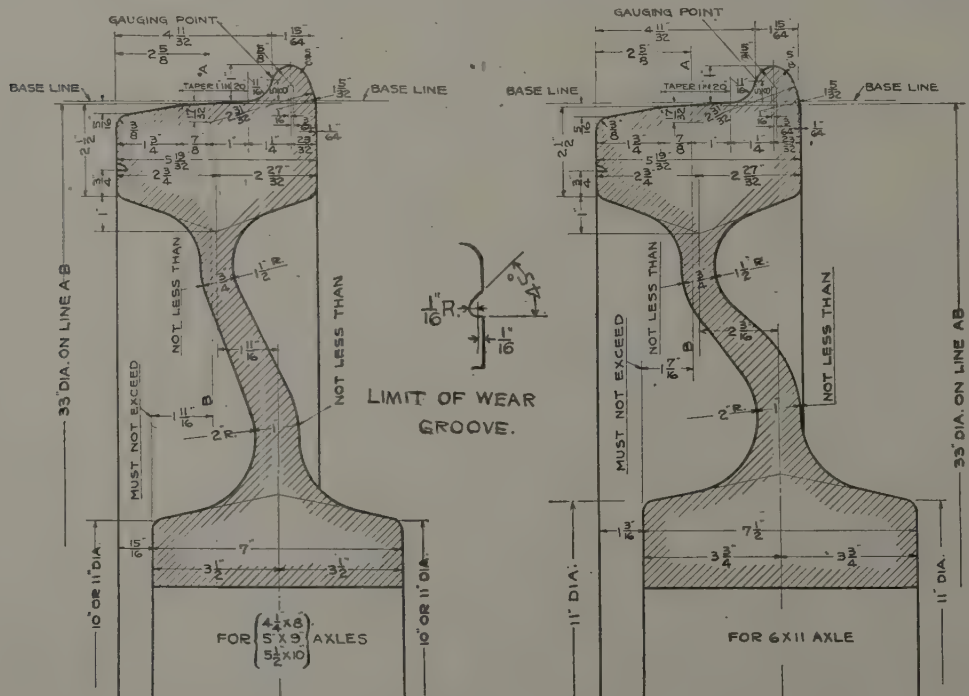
Standard 33 in. Wrought Steel Wheel. (M. C. B. Sheet 25.)
